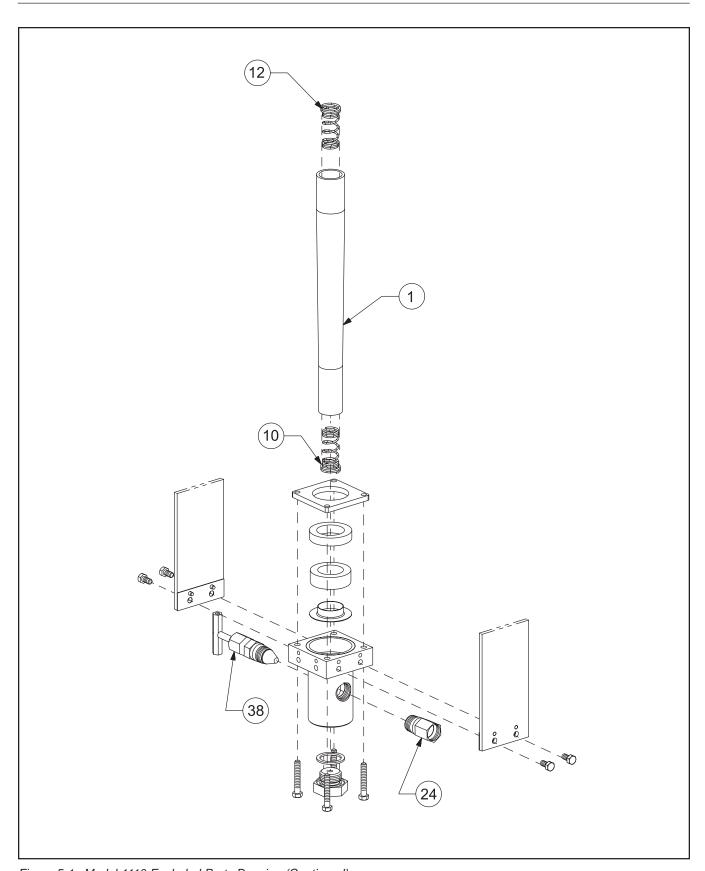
Model 1110 Exploded Parts Drawing (Continued)
